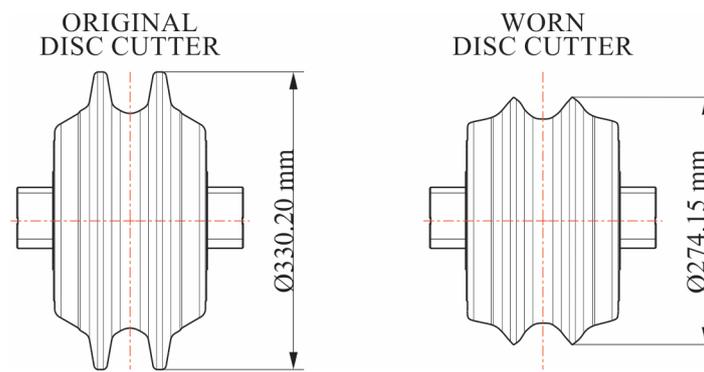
Original cross-section (Ø 330.2 mm) and worn cross-section (Ø 274.2 mm) of the double disc cutter.
